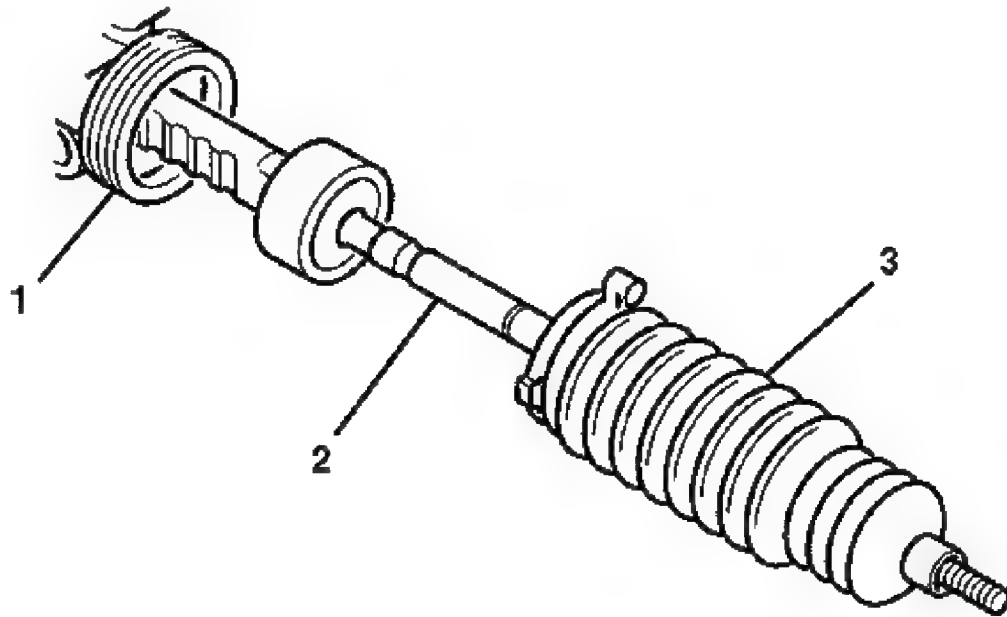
Inner Tie Rod, Rack And Pinion Gear & Rack And Pinion Boot
